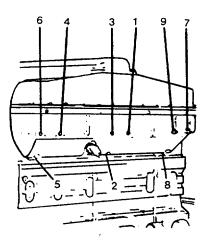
Aftercooler Mounting Torque Sequence.
